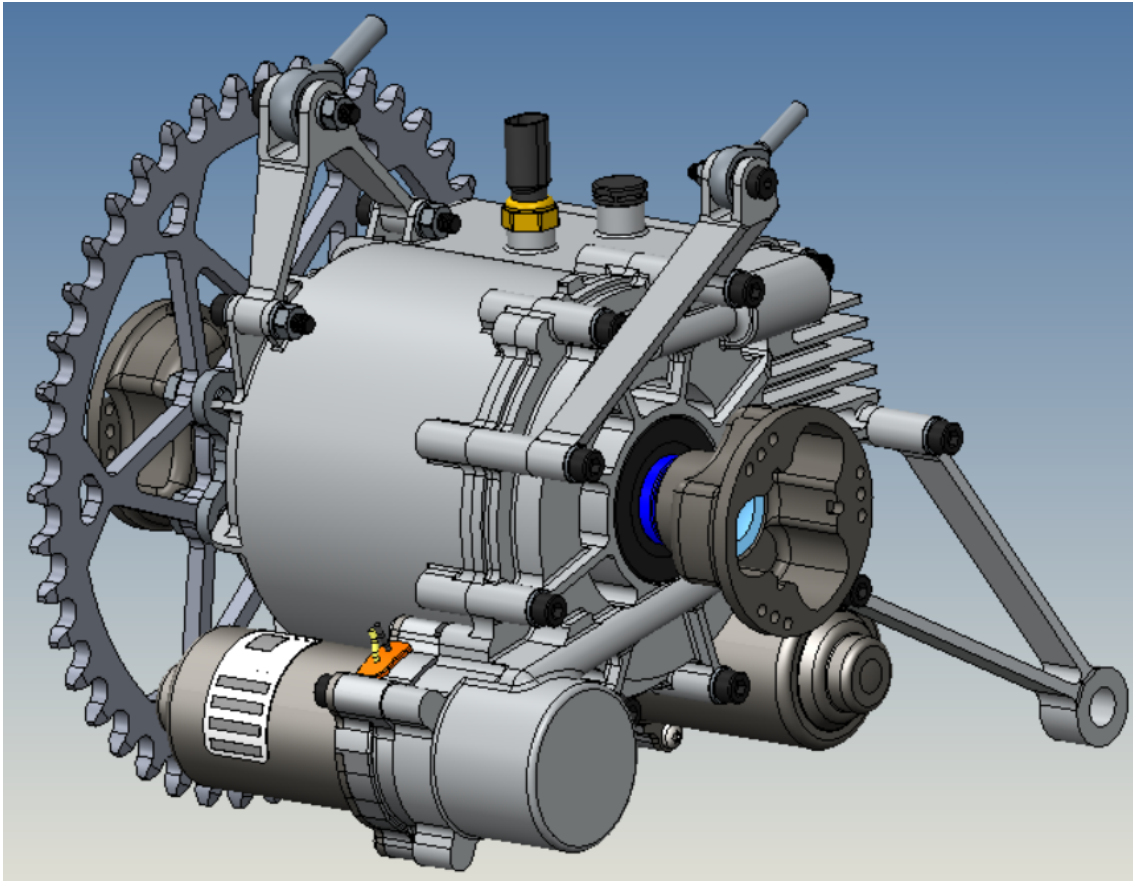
Complete assembly with Gen V actuators (ECU excluded)
